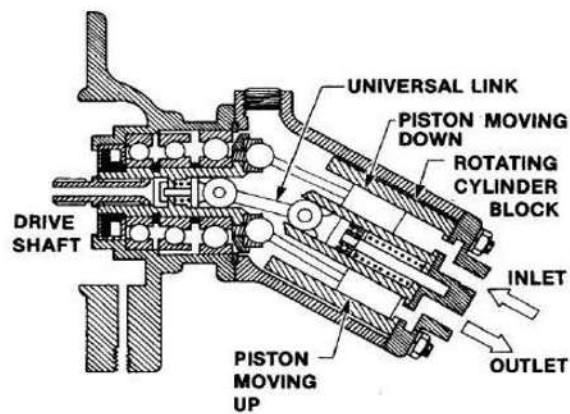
Fixed Angle, Axial, Piston Type Hydraulic Pump
